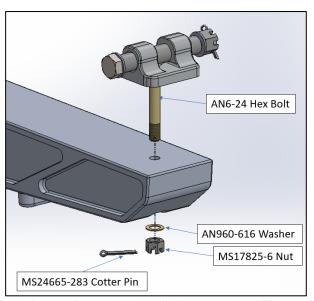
AFM-130-30-2 Aft Attachment Assembly Installation onto the AFM-130-10 Main Beam Assembly
